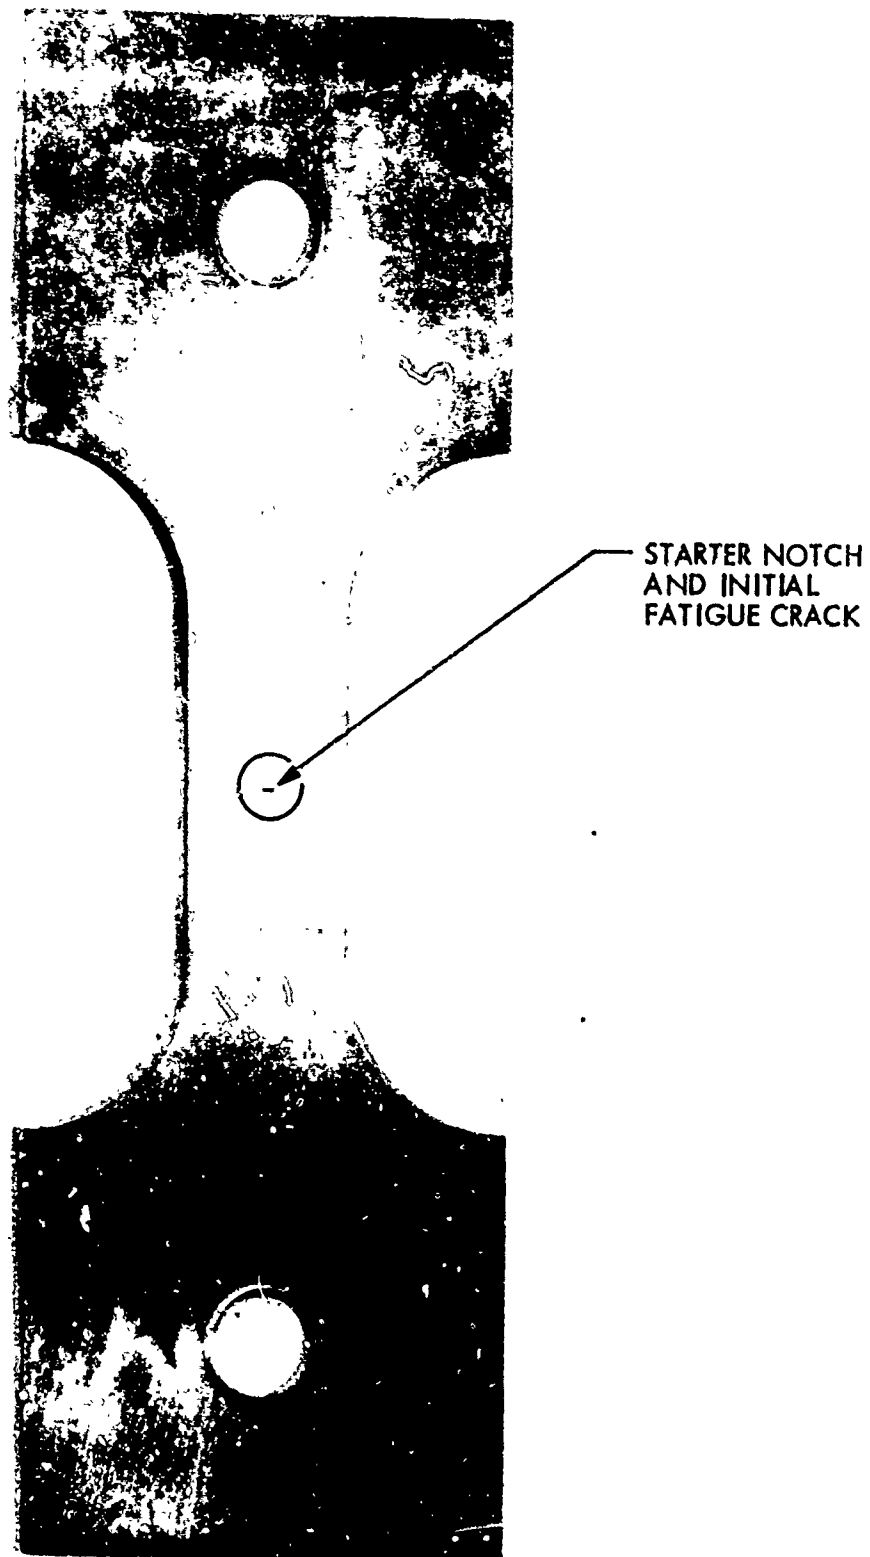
Typical Starter (EDM) Notch with Initial Fatigue Crack
